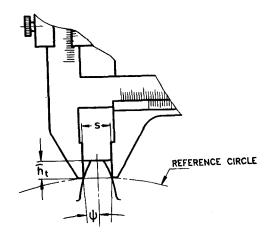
Measurement of Tooth Thickness on Reference Cylinder
